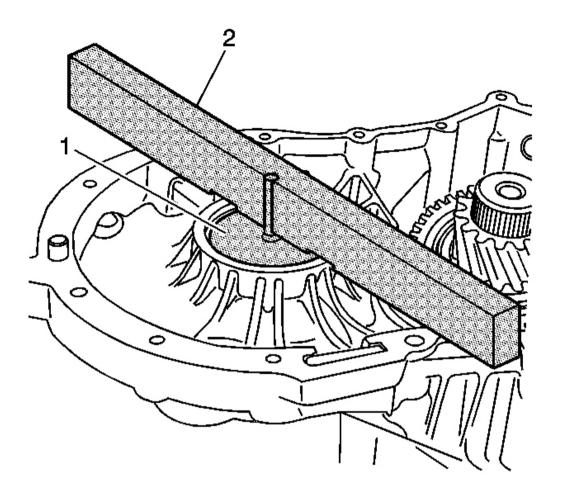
Identifying J 44388-2 & J 44388-1 Courtesy of GENERAL MOTORS CORP.
